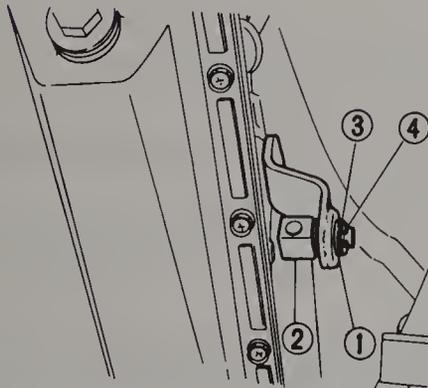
Automatic shifter-to-transmission connector components (Sec 14)
